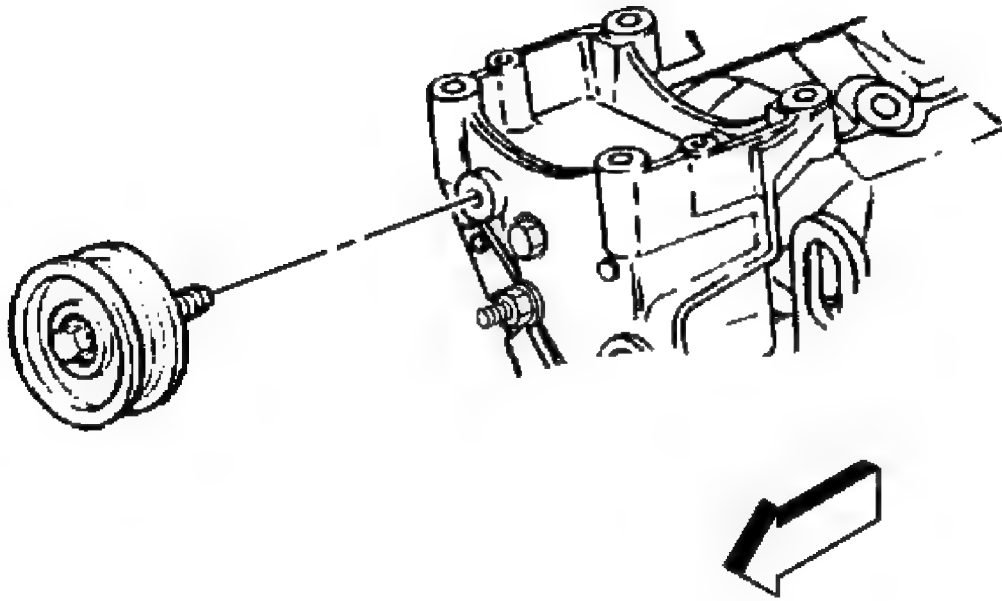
View Of Drive Belt Idler Pulley Assembly
